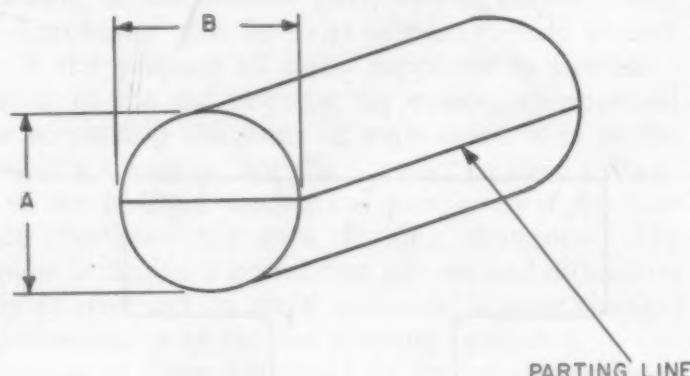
In this cylindrical body, dimension B can be held closer than dimension A. The trimming dies control B and are not subject to the heat checking and wear of the hot forging dies that control A.
